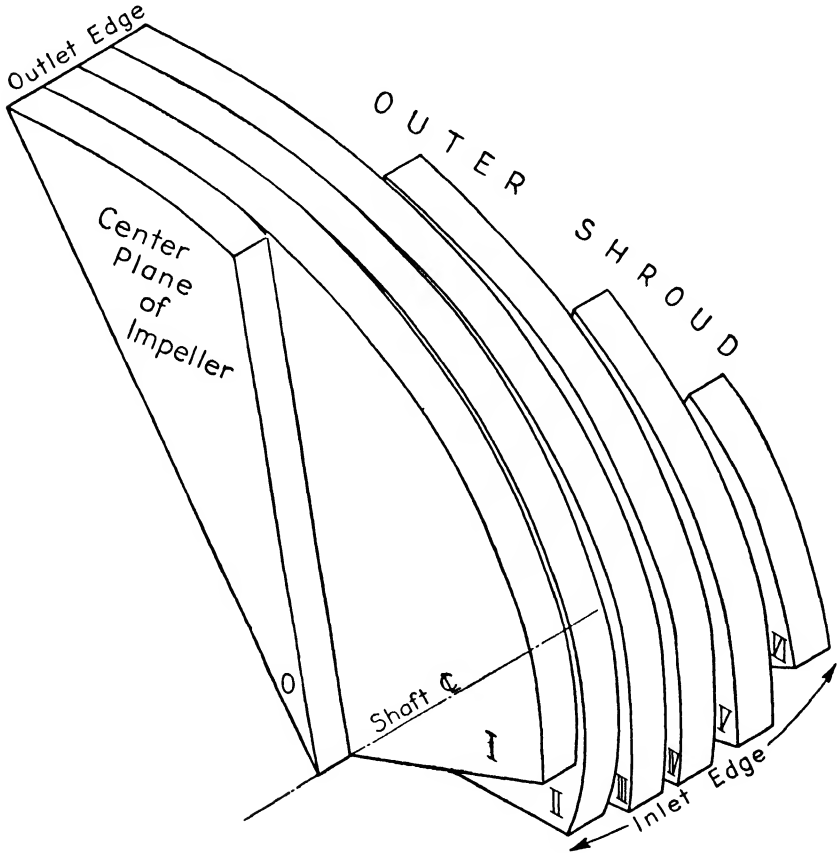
Isometric view of one-half of impeller, showing boards in place ready for surfacing.
